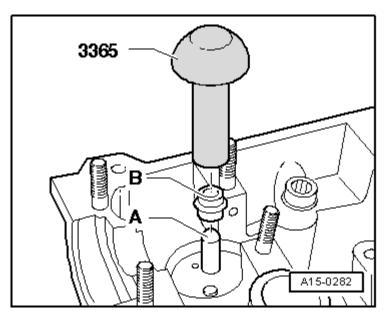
Identifying Plastic Sleeve, New Valve Stem Oil Seals & Valve Stem Seal Driver 3365
